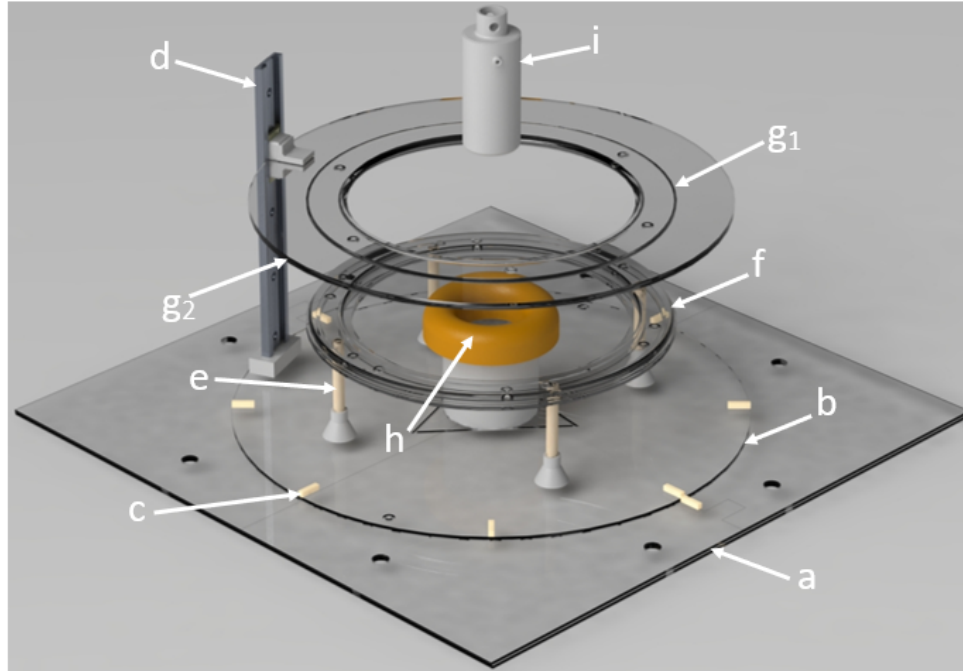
CAD representation of forming set up consisting of: (a) Perspex lower base, (b) Perspex upper base, (c), 45° rotation-mark increments, (d) linear steel bearing, (e) wooden support columns, (f) Perspex lower blank-holder, (g₁) Perspex bottom ring of upper blank-holder, (g₂) Perspex top annular plate of upper blank-holder, (h) 3-D printed female die and (i) 3-D printed male punch.
